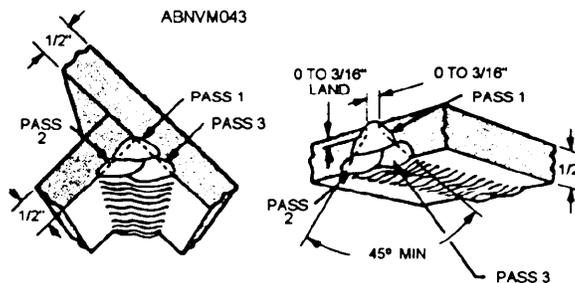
Joint design and weld pass sequence vertical-position multipass fillet and butt welds.
